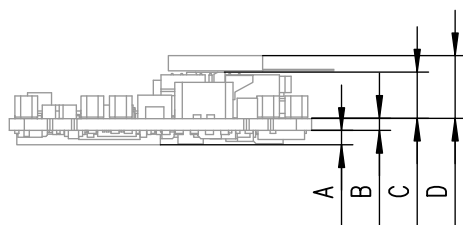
Mechanical Dimensions ETK-S20.0: Microcontroller with Socket Adapter mounted
